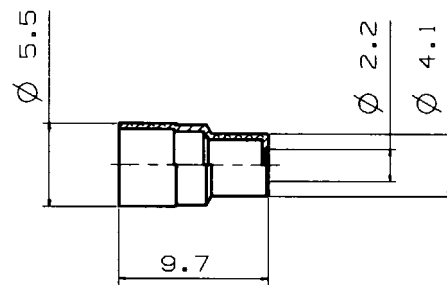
#4 : Crimping ring (for 2.0mm cord)
